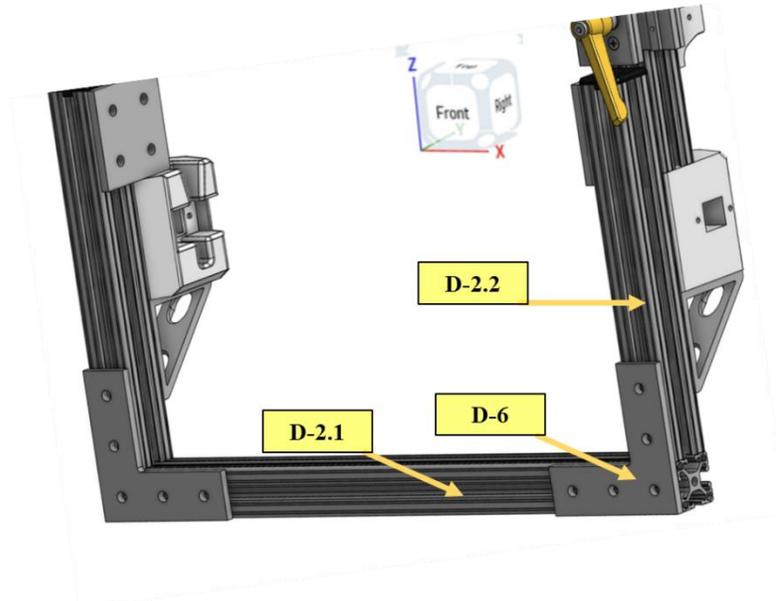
Attach Inner Lower Horizontal Strut to Inner Donning Stand.
